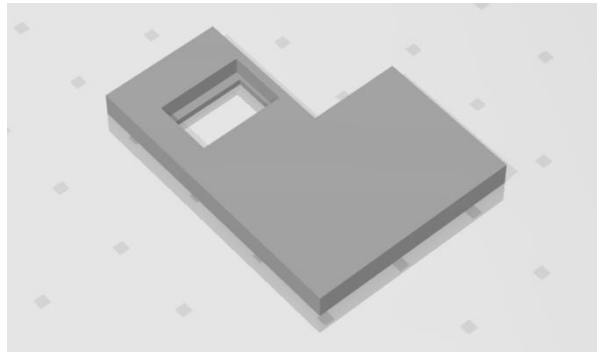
Protruding piece to be installed on Battery Module for attachment to Audio
